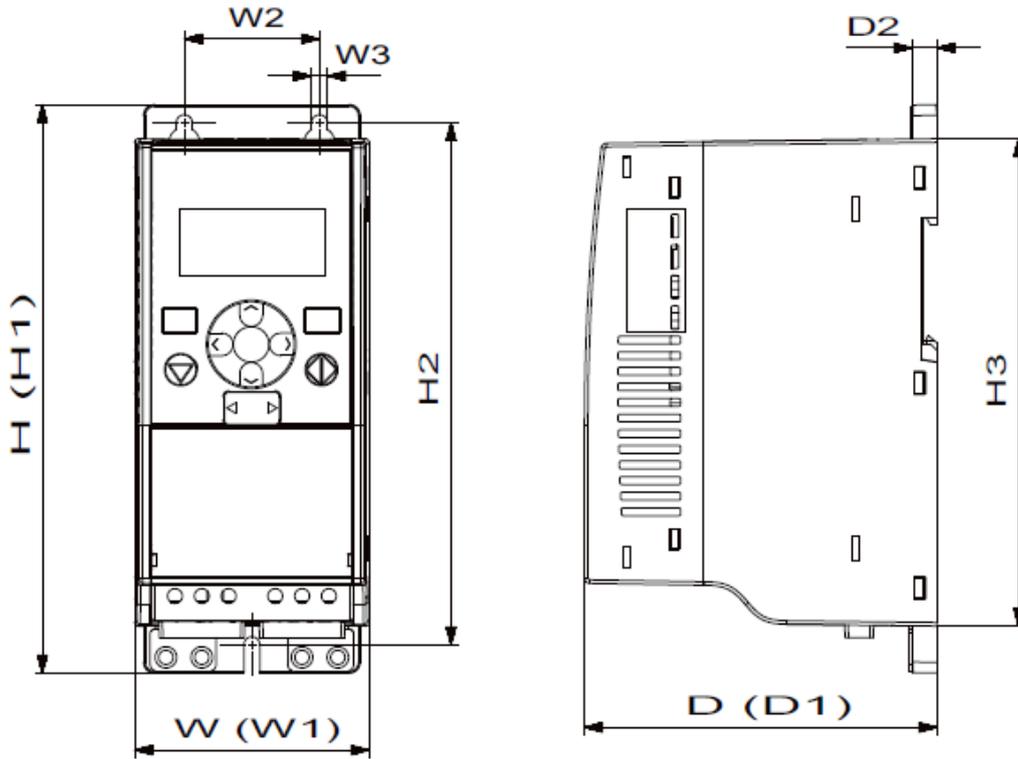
Vacon 20 dimensions, MI1 - MI3
